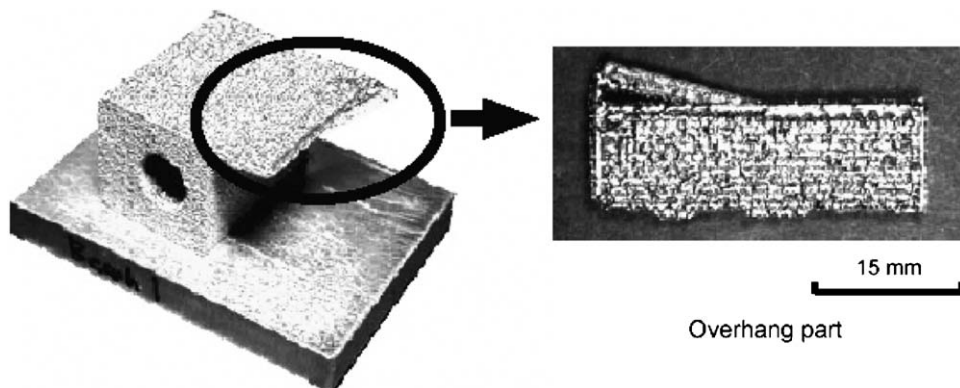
Fracture of overhanging part of model during forming in SLM.
